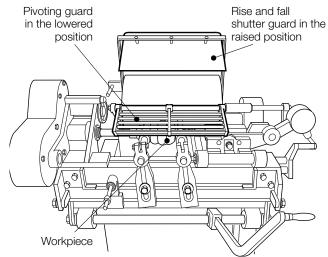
Position of guards during machining of the workpiece (pivot guard lowered to prevent access to rotating cutters and workpiece, shutter guard in raised position)
